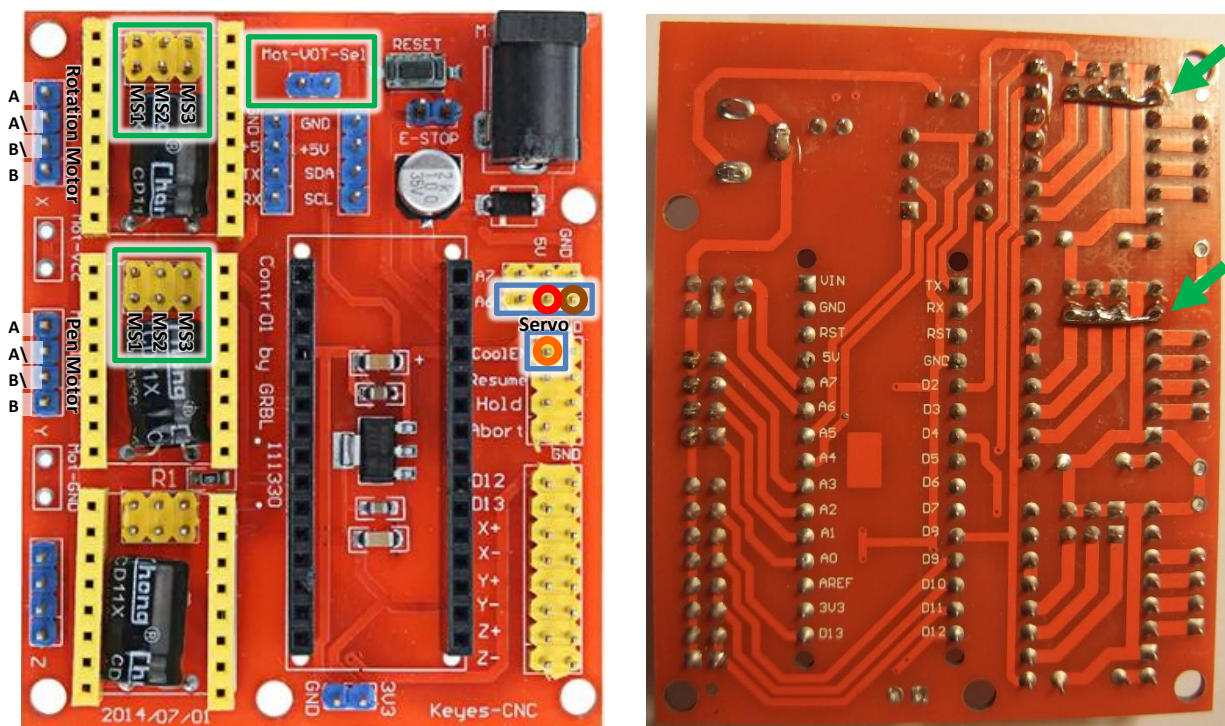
CNC Shield V4+ (a) Jumper and pin assignment of EB2020, jumper MS1-3 must be removed, 'Mot-V0T-Sel' must be set. (b) Solder wire bridges to enable the 1/16 microstepping of the A4988 StepSticks.
